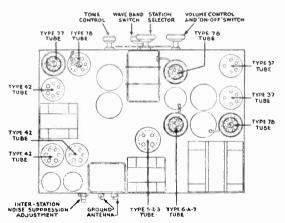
Top View of Chassis, showing Tube Locations, and Major Parts
